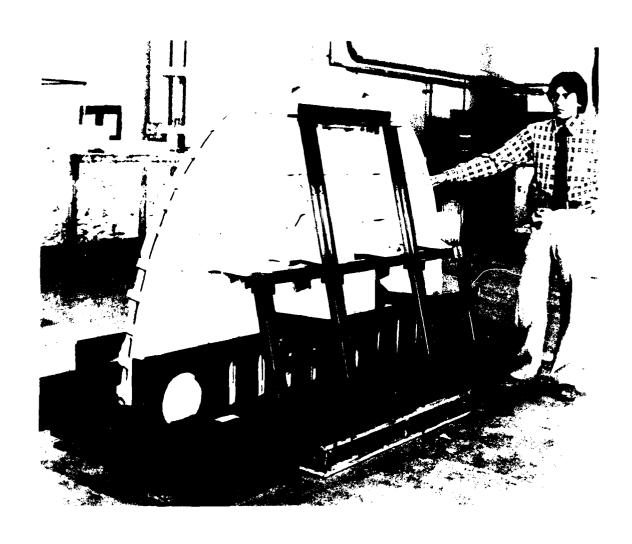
Heat Treat Fixture 162-00017 with Bulkhead Installed - Aft Side
